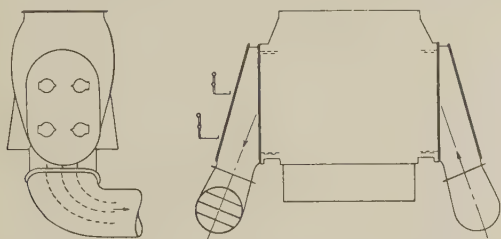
RECENT SINGLE-PASS CONDENSERS HAVE A BOTTOM OUTLET ON THE DISCHARGE WATER BOX TO SAVE CIRCULATING-WATER PIPING AND HYDRAULIC HEAD LOSS
